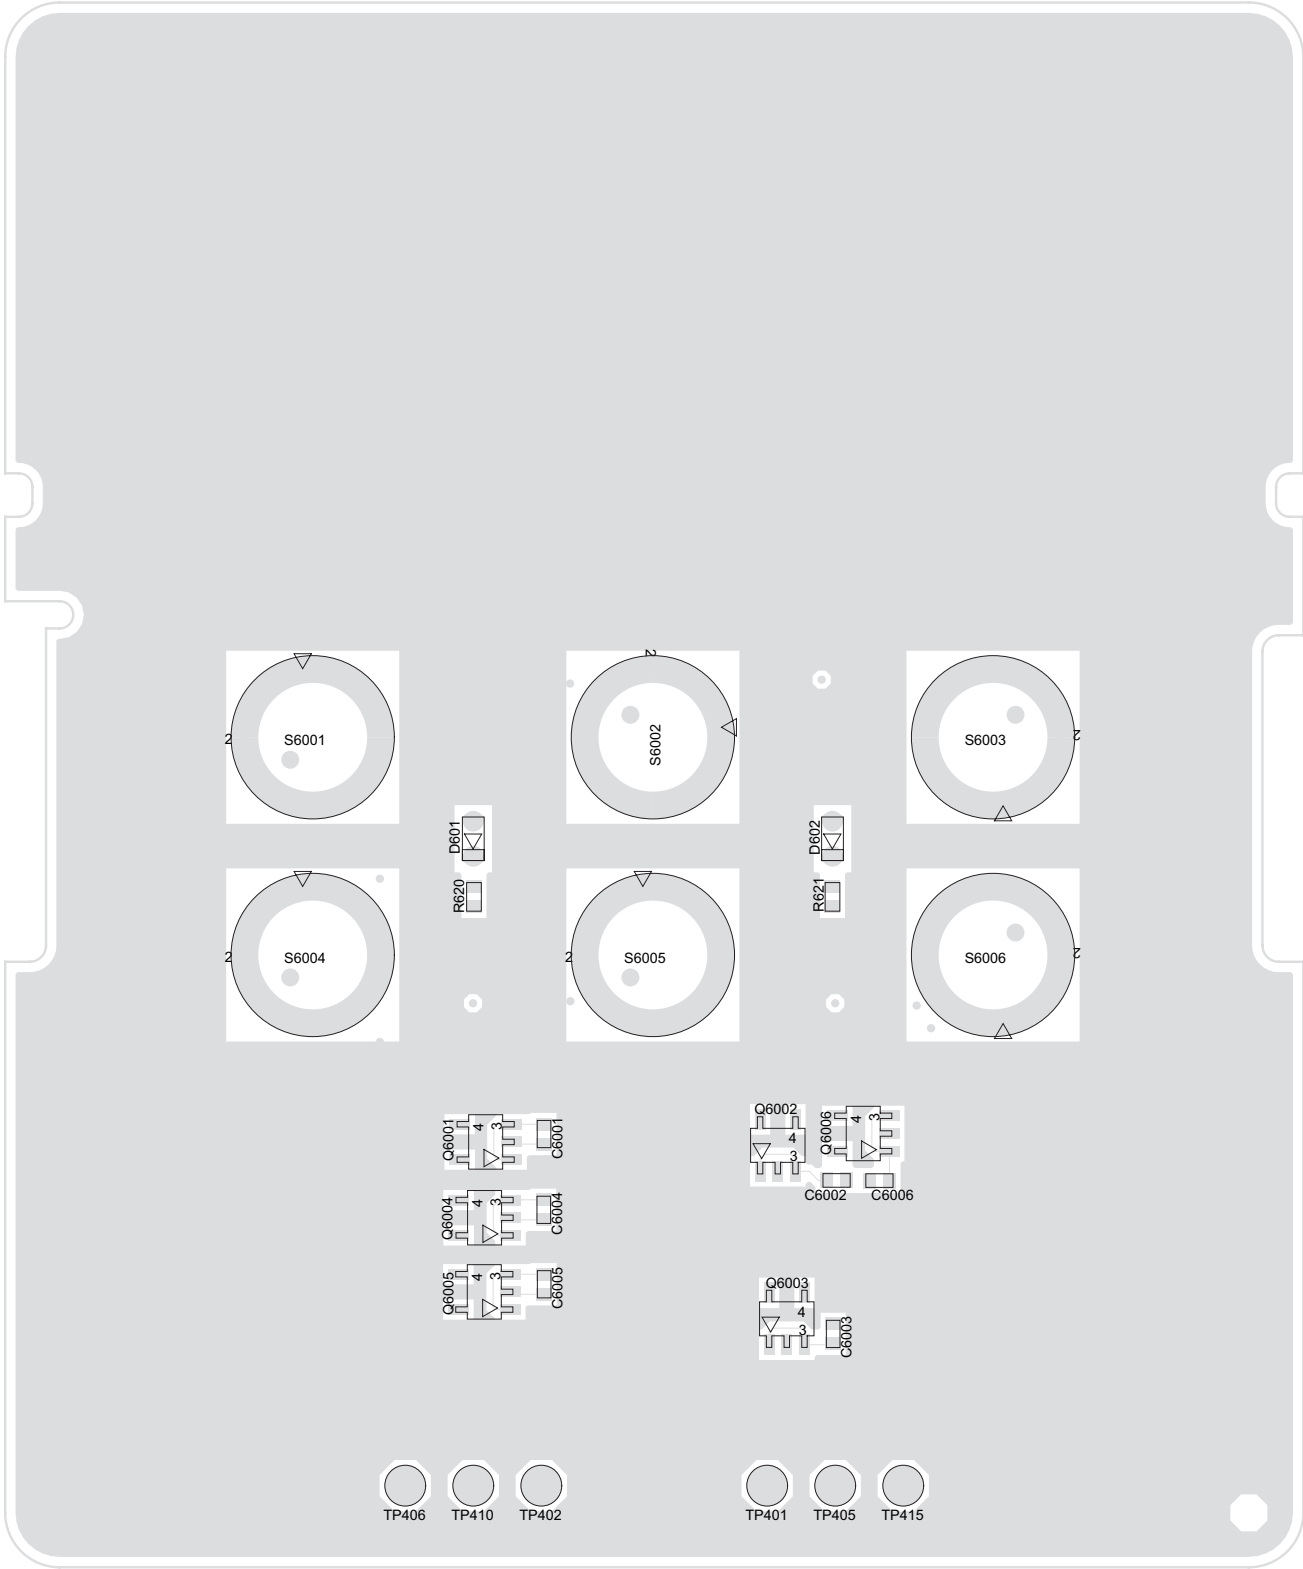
Controller Board Top View (PCB No. 8471679L01)
